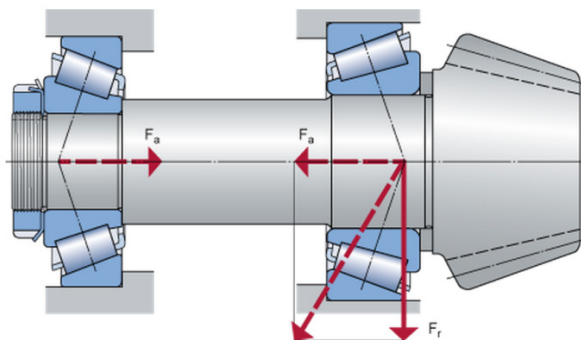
Typical shaft fit in a pair of tapered roller bearings
